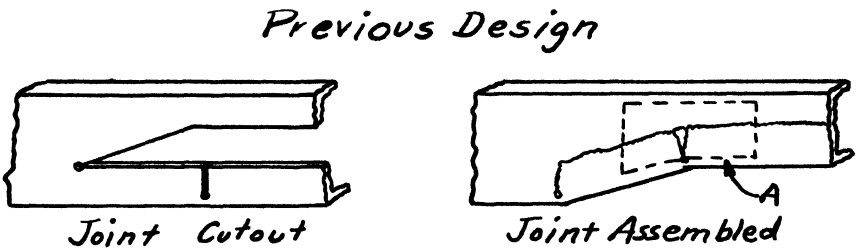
(left). Joint cut-away. Fig. 6. (right). Joint assembled in previous design.
